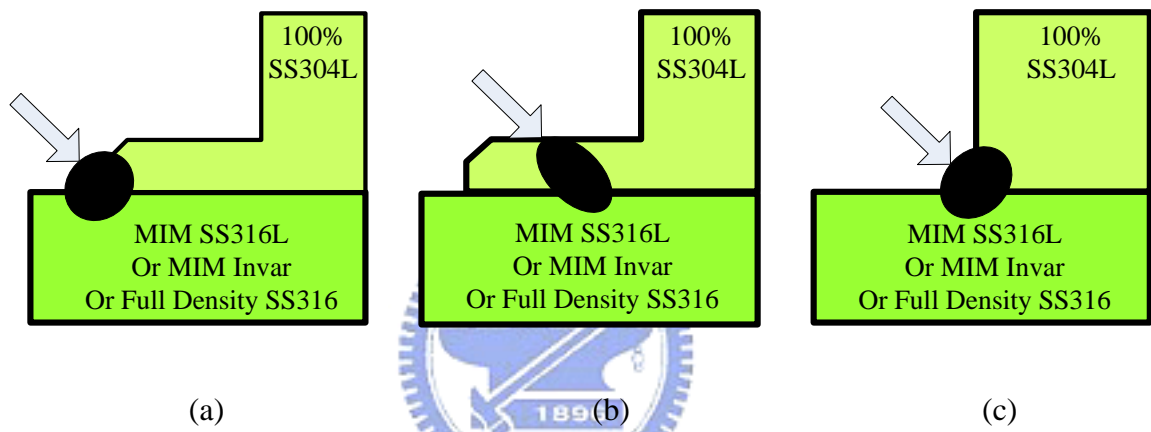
Schematic joint geometries for laser welding (a) Lap-fillet joint, (b) Lap joint, and (c) Fillet joint. Arrow indicates the welding spot.
